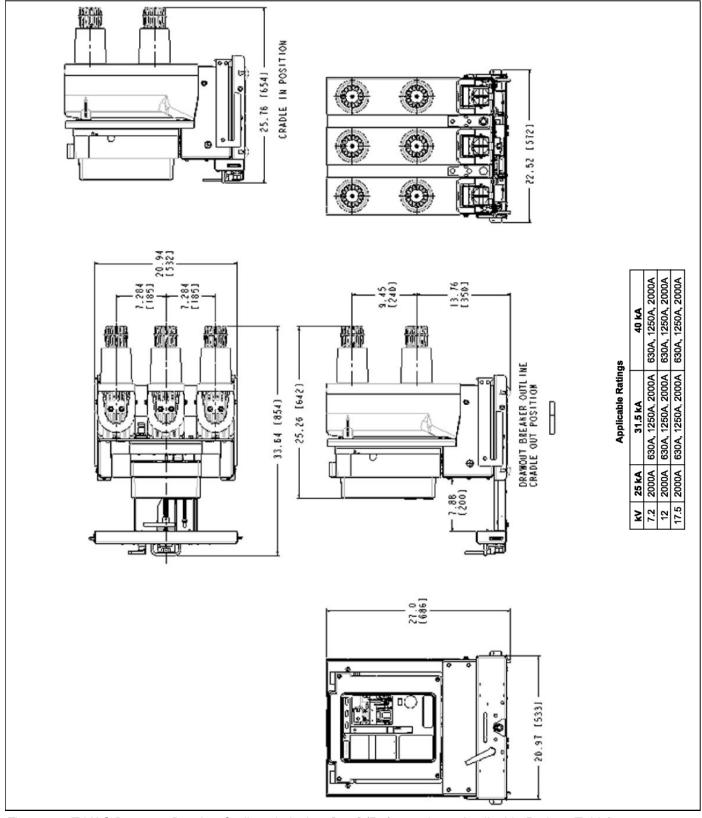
T-VAC Draw out Breaker Outlines in inches [mm] (Refer to above Applicable Ratings Table)
